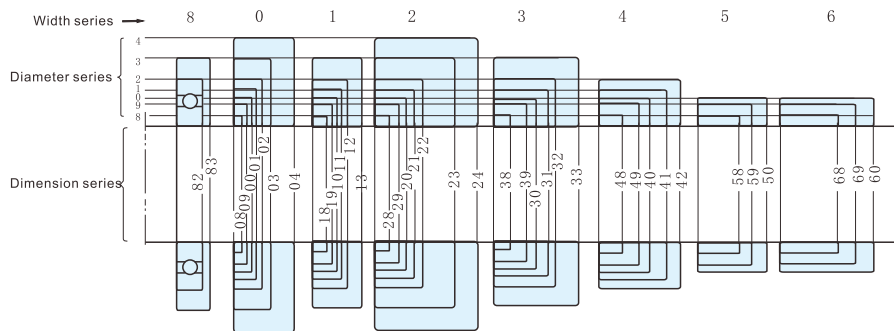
Dimension series of radial bearings(excluding tapered roller bearings)
